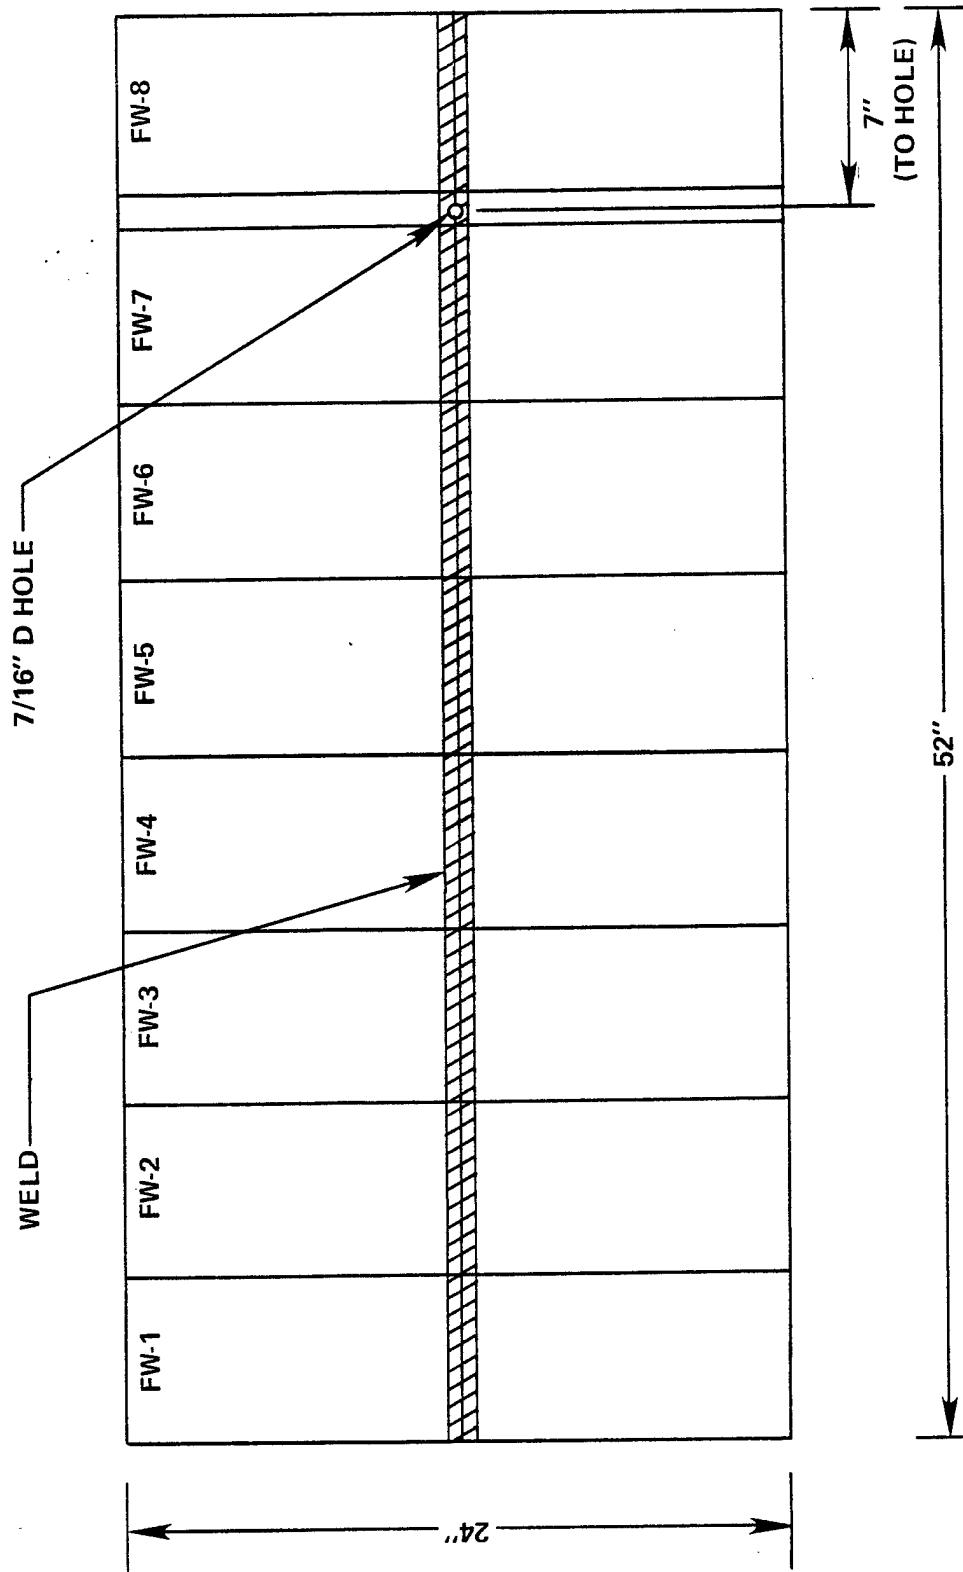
Titanium Electron Beam Weld Specimen Layout Diagram
